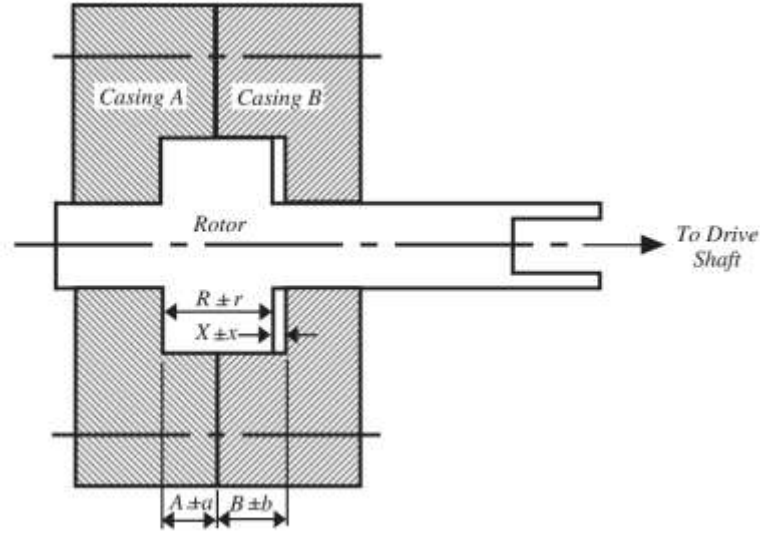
Tolerance Accumulation in gear pump assembly. (Srinivasan, 1994)
